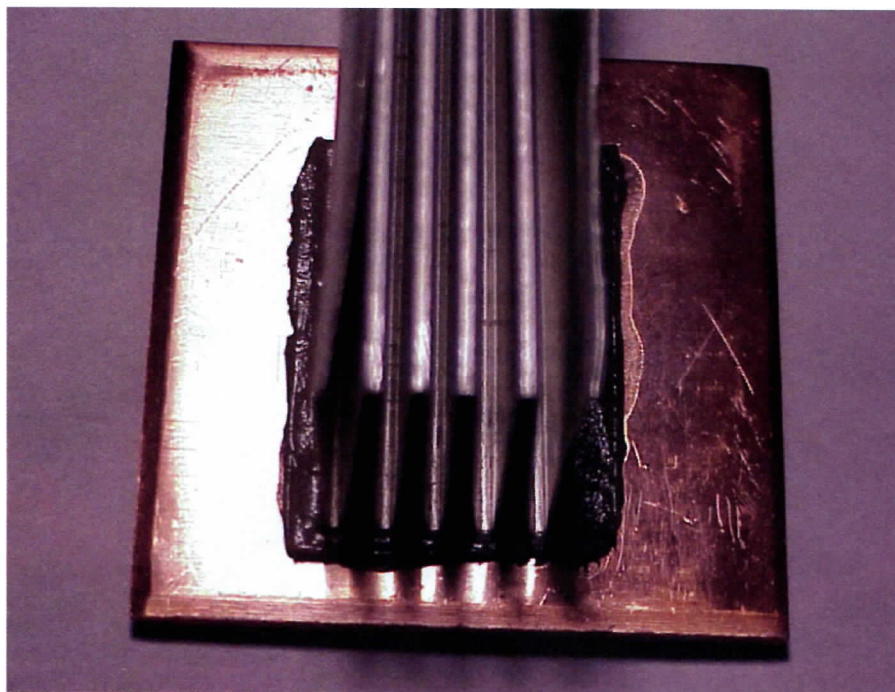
An aluminum fin placed on a soldering filler metal paste dispensed on copper.
